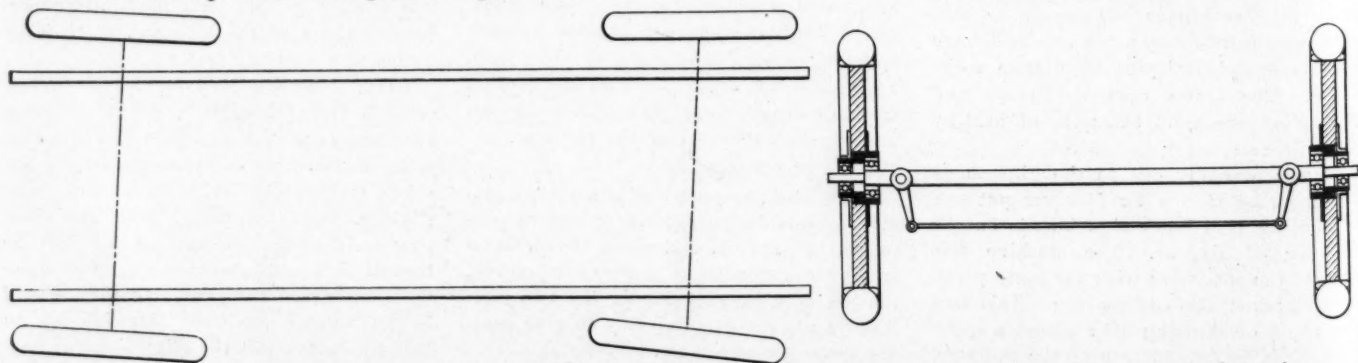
Misalignment of wheels which comes with worn bearings and is cause of short tire life
